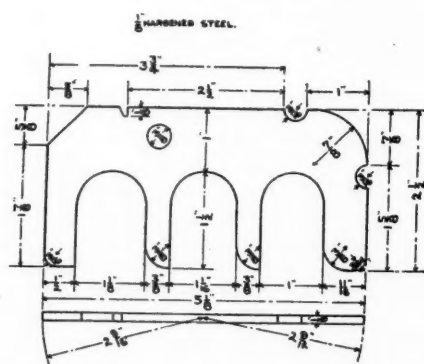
Wheel Defect and Worn Coupler Limit Gage.
